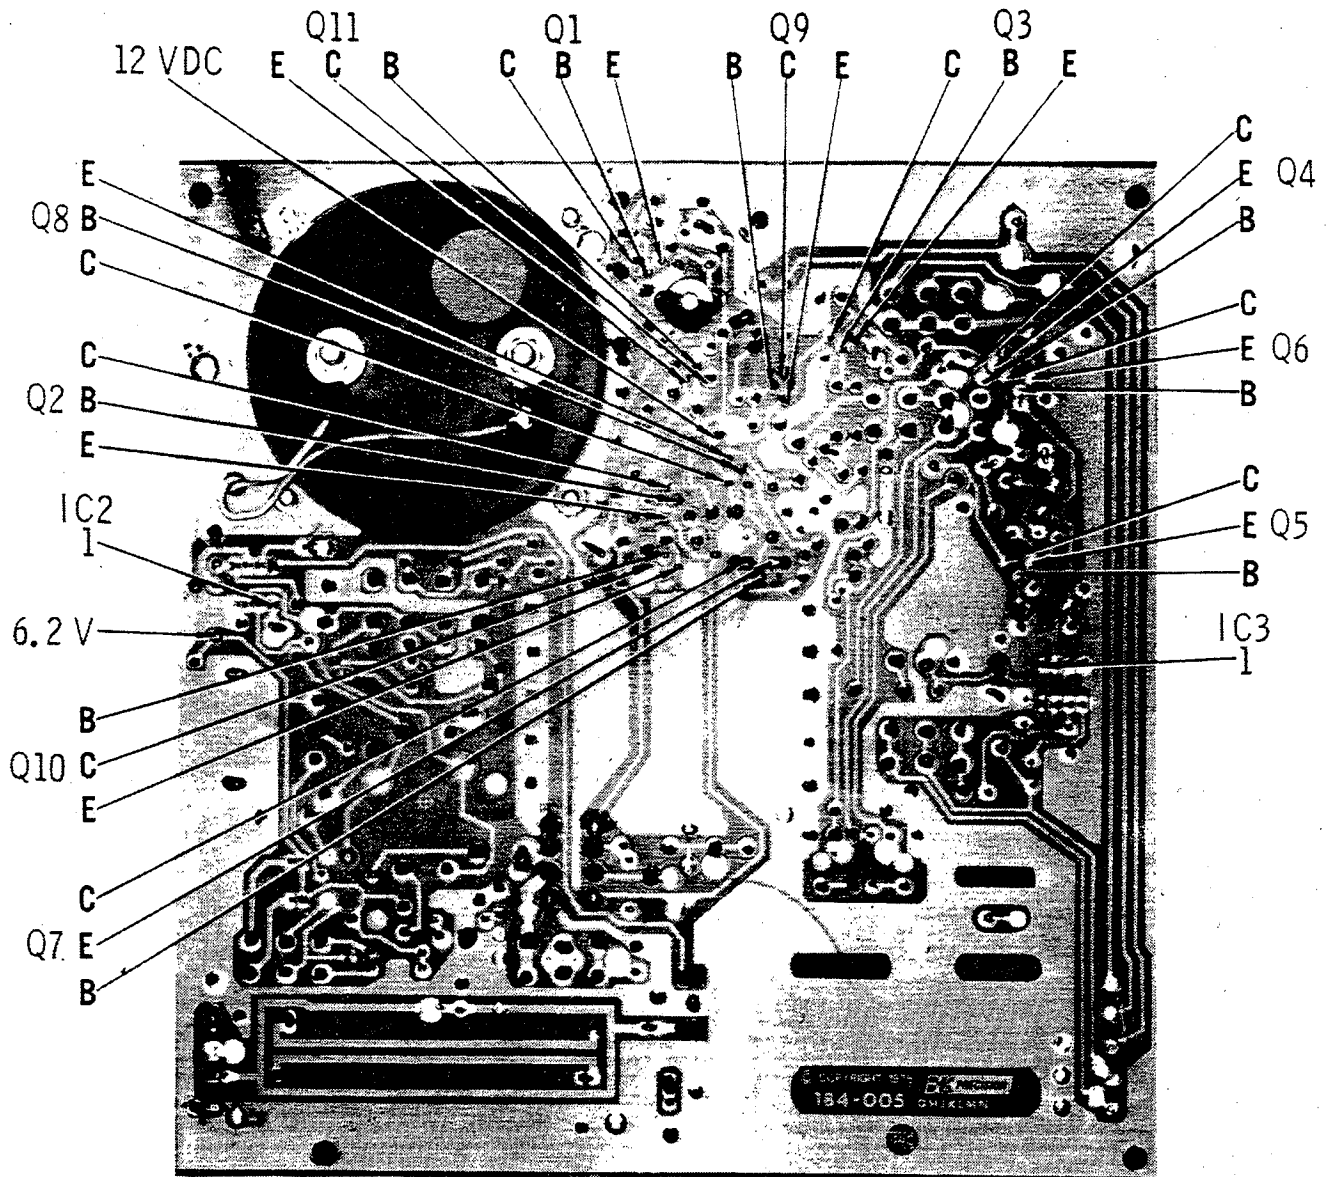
RF Printed Circuit Board, Bottom View, Voltage Measurement Points.
